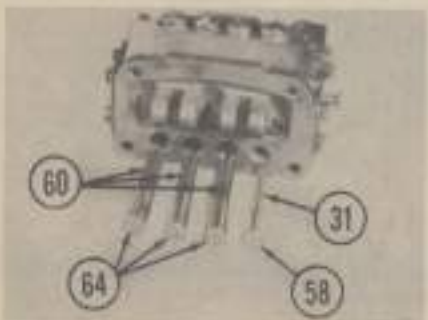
View of pump plungers and return springs removed from pump body. Refer to Fig. 149 for legend.
